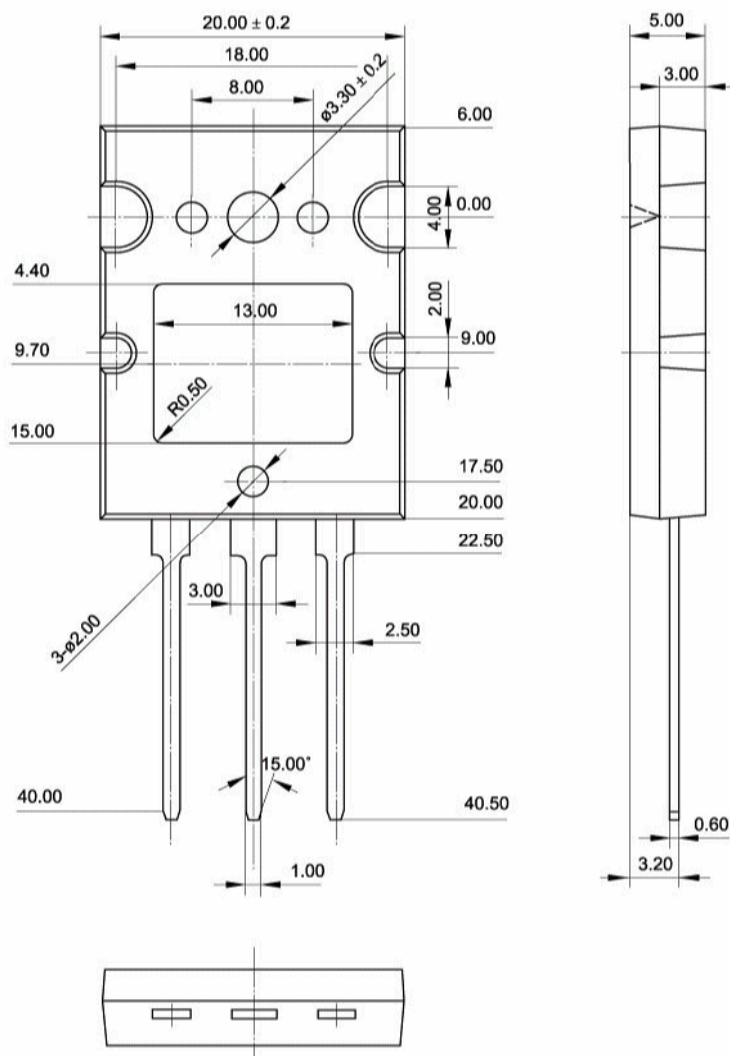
Outline dimensions (unindicated tolerance:±0.50 mm)
